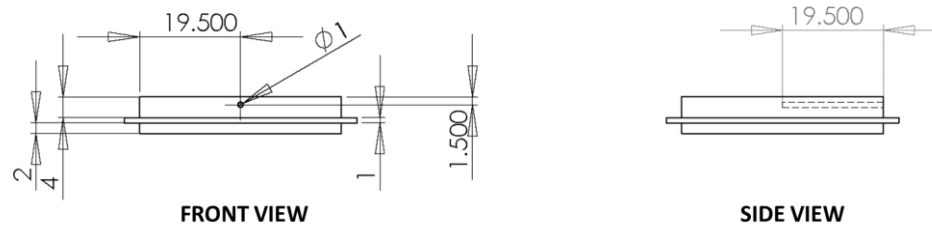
Front (left) and side (right) views of the copper surface. All dimensions shown are in mm.
